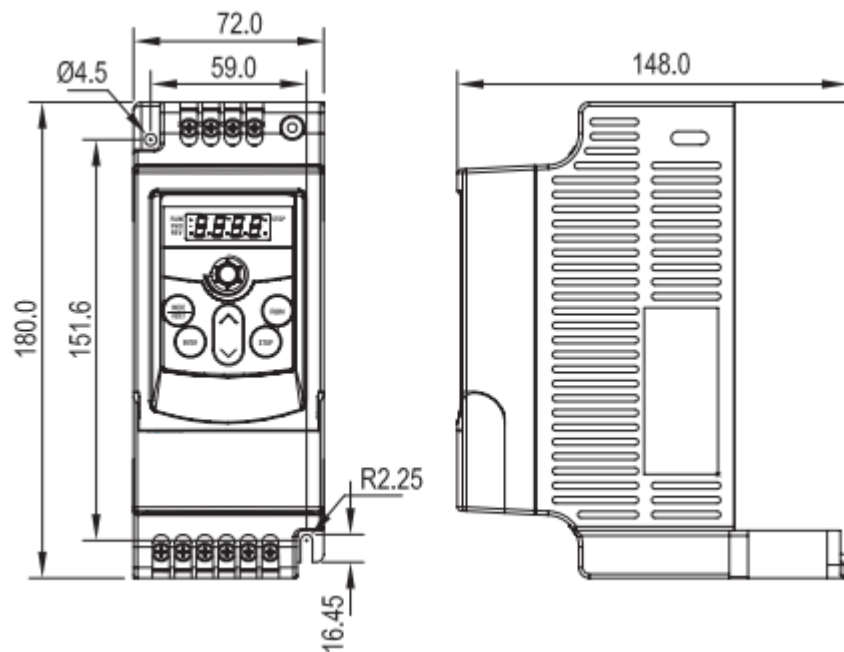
Dimension and installation size of FVR0.2~0.75S1S-7E/FVR0.4~1.5S1S-4E (unit: mm)
